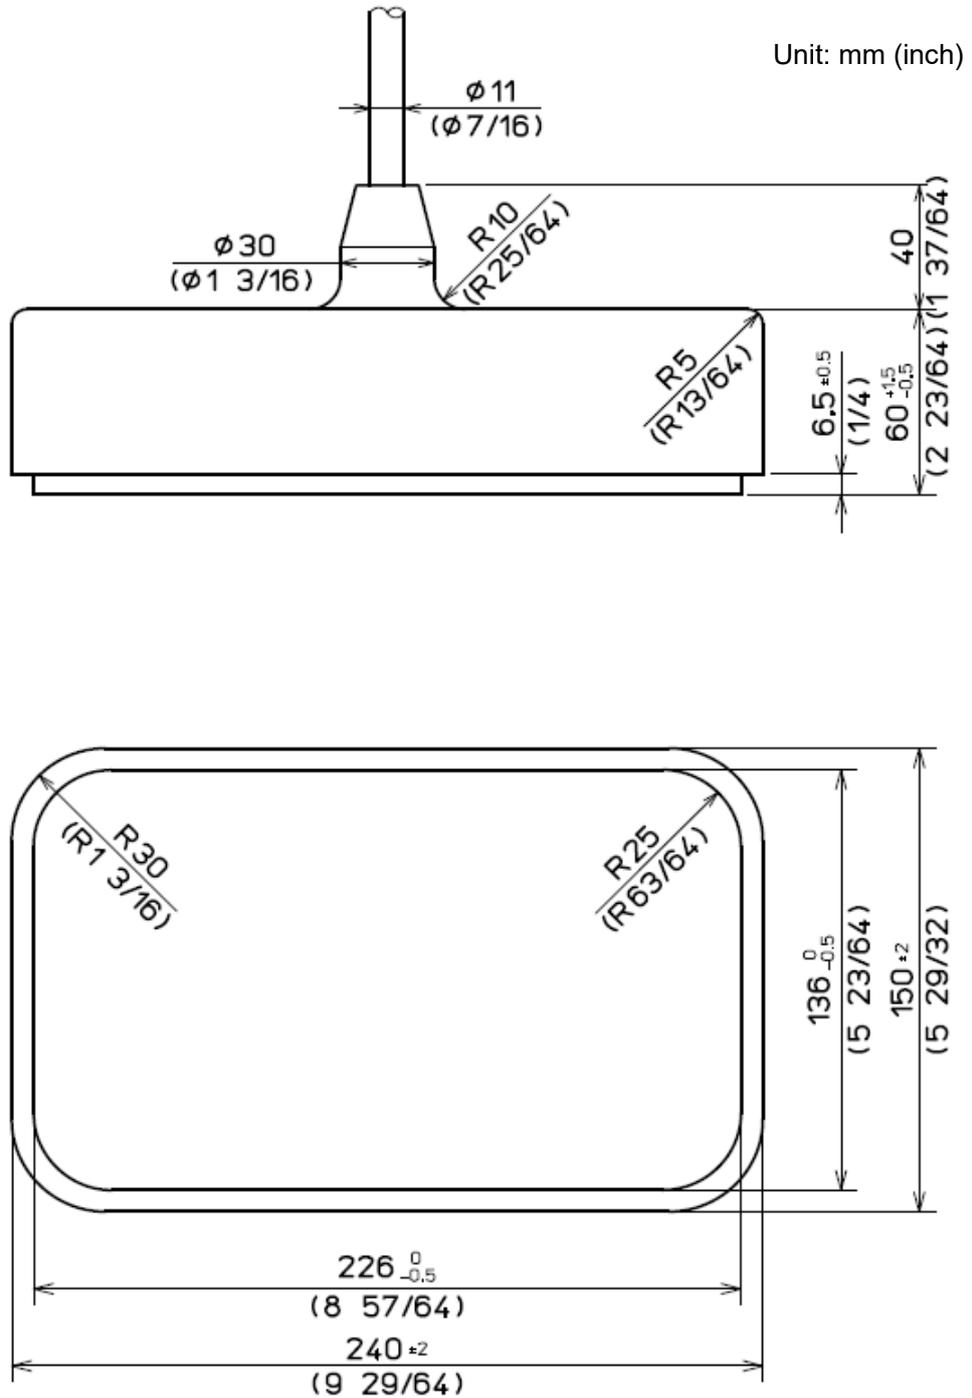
Outline dimensions of a transducer (TD-754)
